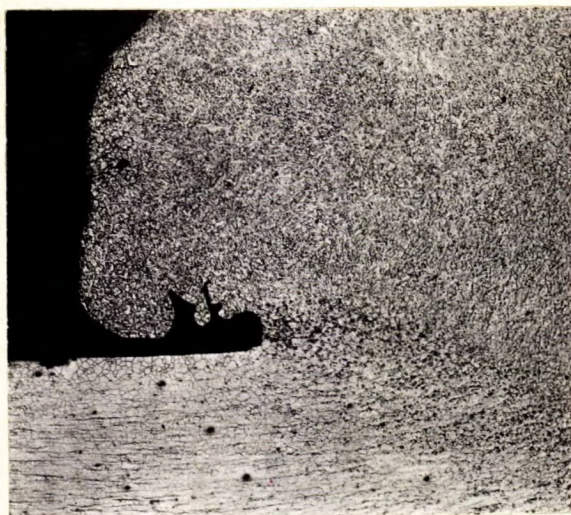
FIGURE SHOWING LACK OF PENETRATION AT ROOT OF WELD.
